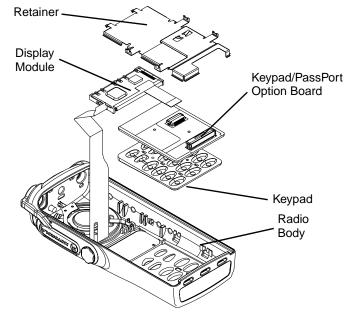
Removing the Keypad Retainer and Other Boards from the Radio
